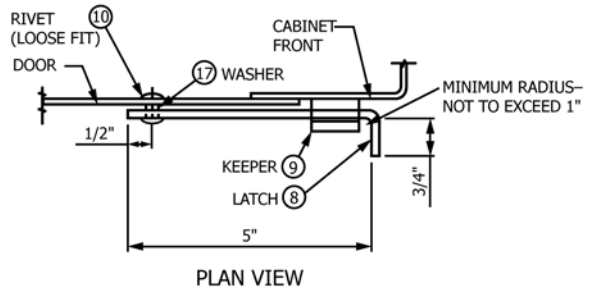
Latch Assembly, Type II, Grade 1 Cabinet Shown, Others Similar, Detail "B"
